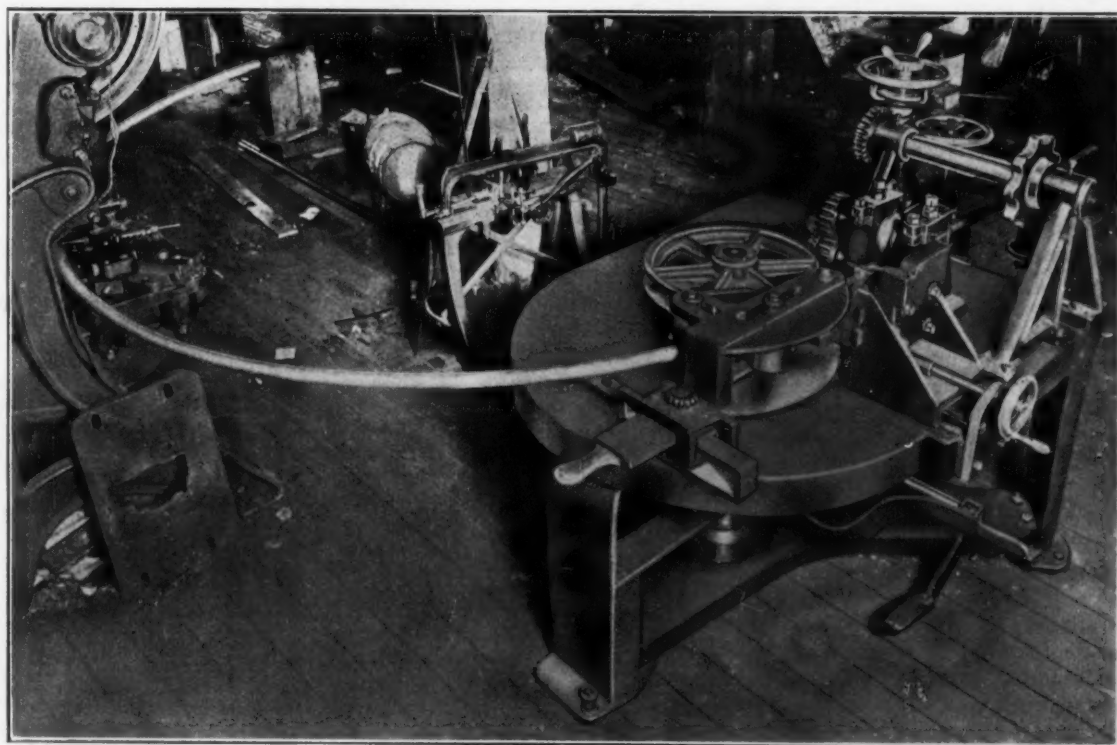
View Looking Down on a Machine Forming a Semicircular Bend of  $5\frac{1}{2}$ -Ft. Radius.
